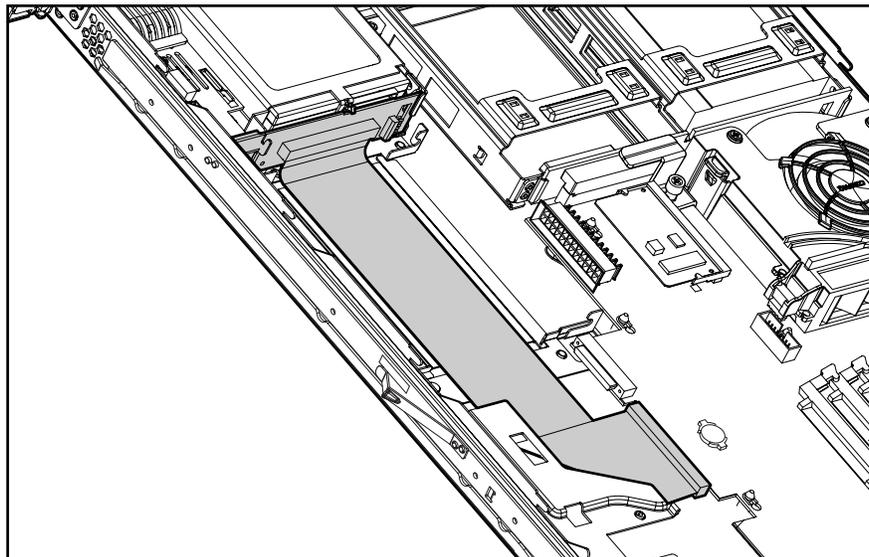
CD-ROM (DVD-ROM)/diskette assembly backplane (PCI riser board assembly, baffle, power supply, and cable protector removed for clarity)
